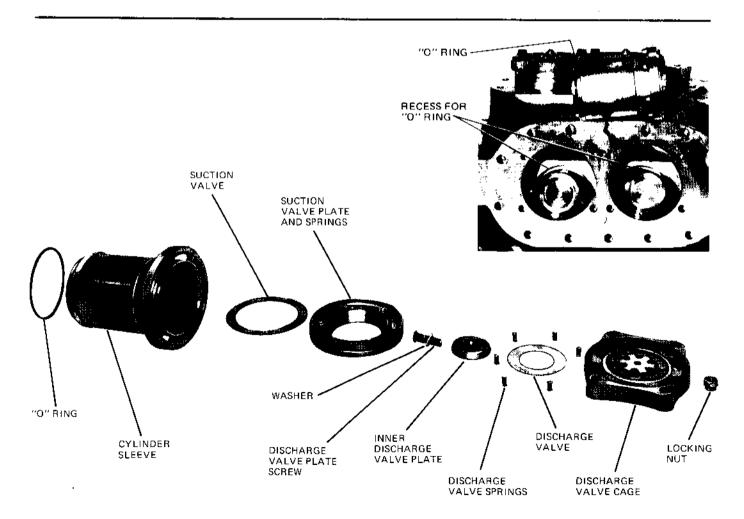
REMOVING VALVES AND CYLINDER SLEEVES
